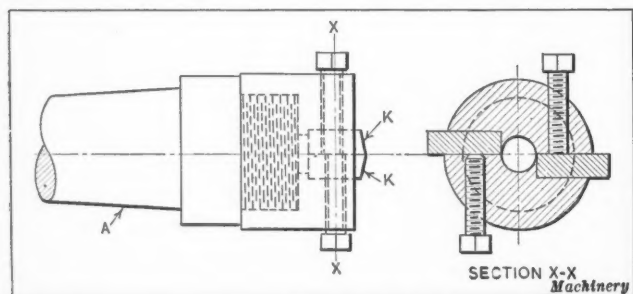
Tool used for Second Operation on Bushing shown in Fig. 1
